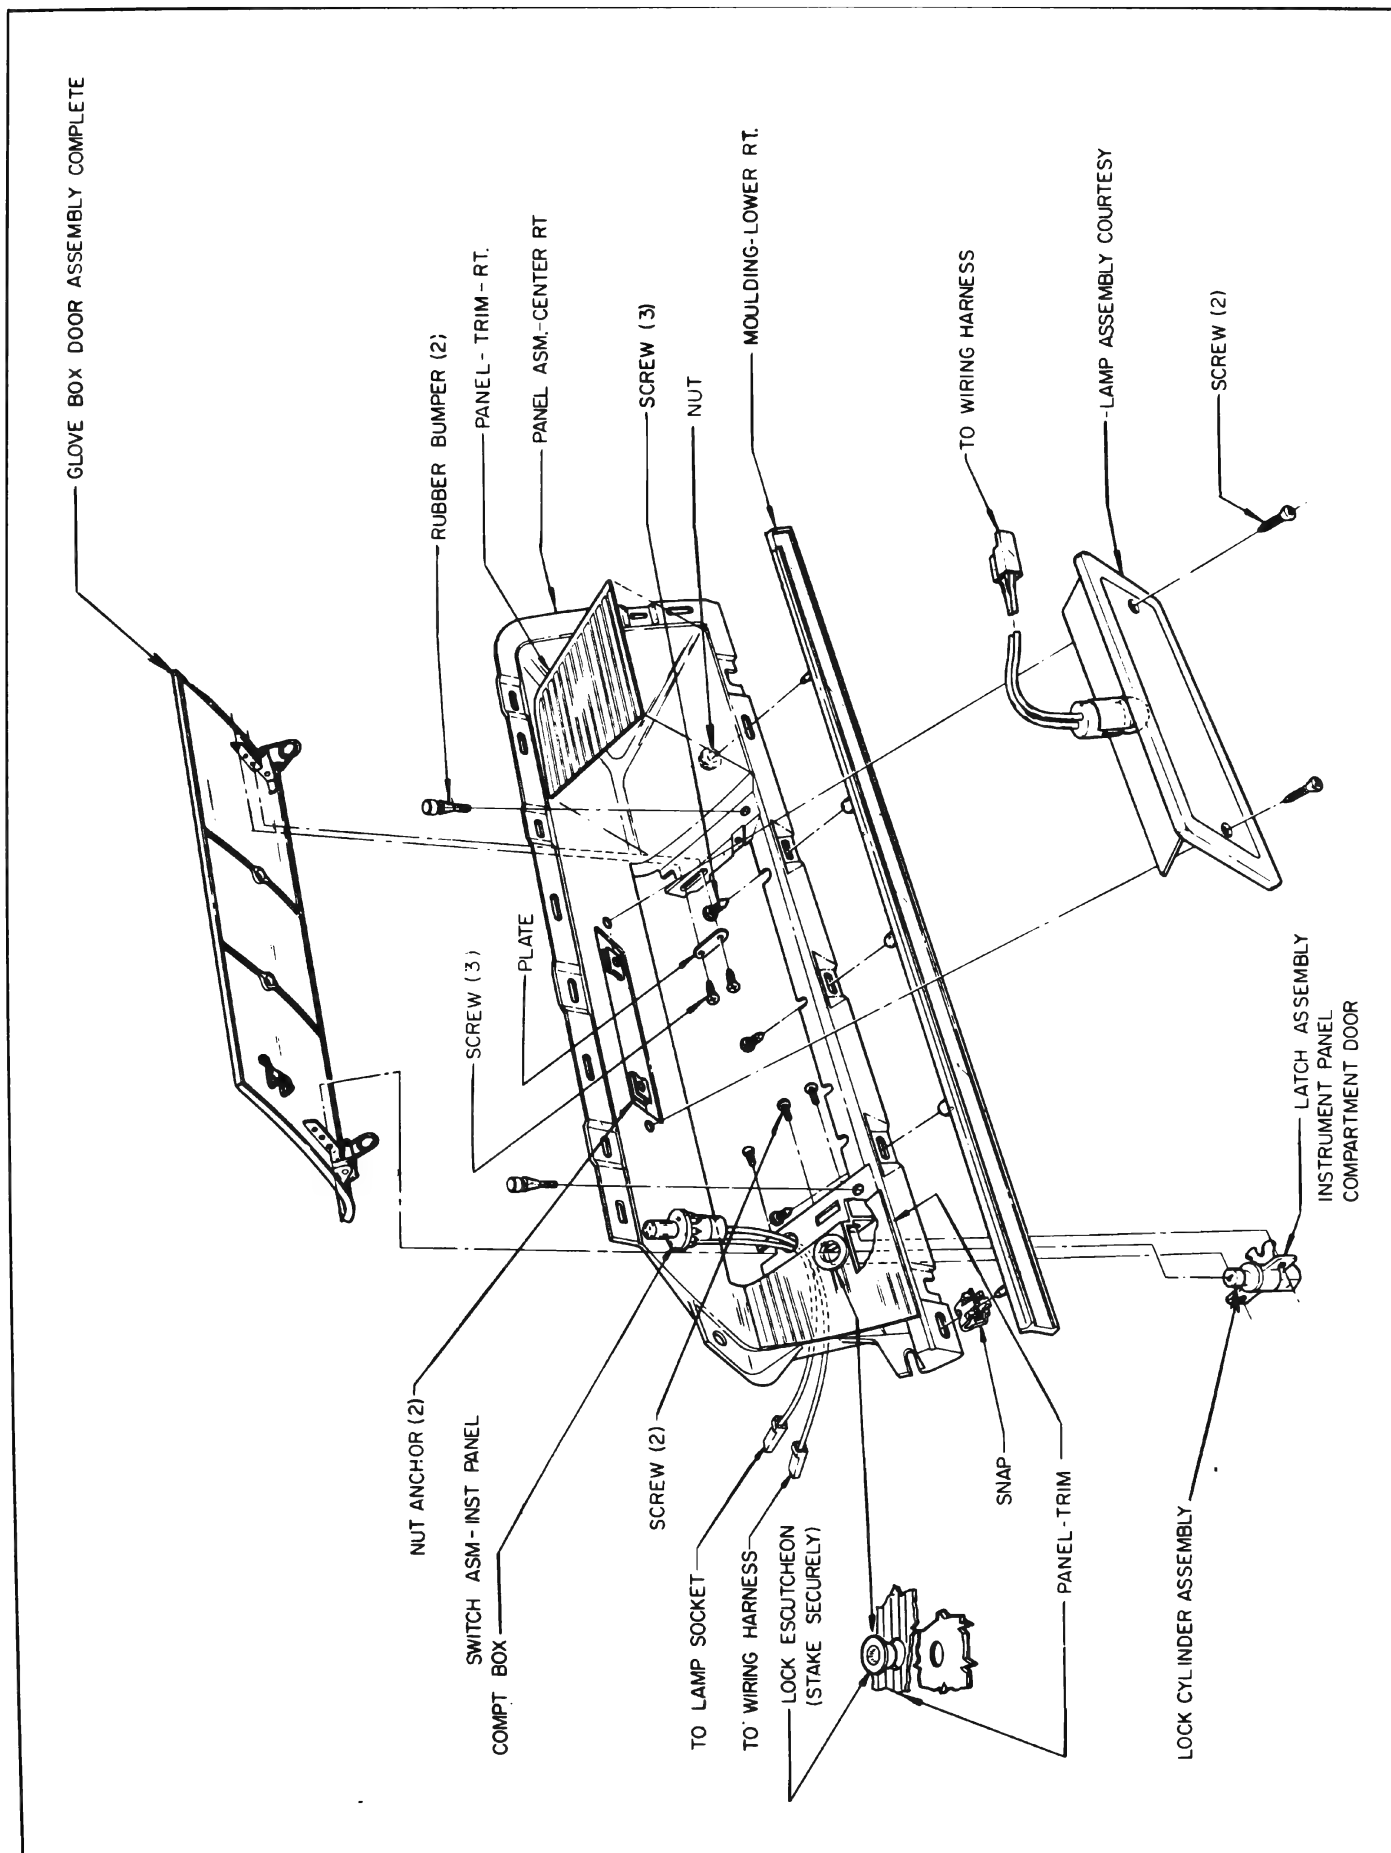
Right Center Instrument Panel Assembly - Riviera
